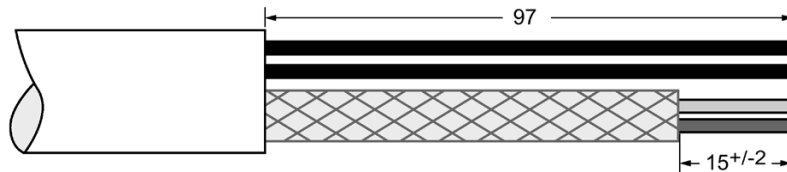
Stripping dimensions for PROFIBUS Hybrid cables
